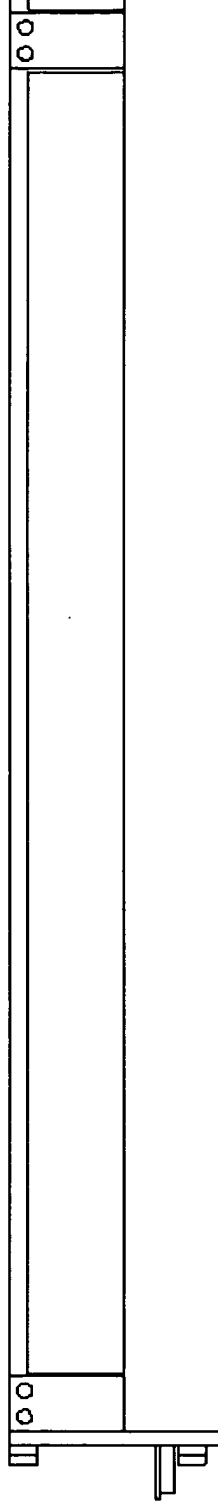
B: Front view of the right end of a floor frame (40 foot high cube collapsible cargo container)
